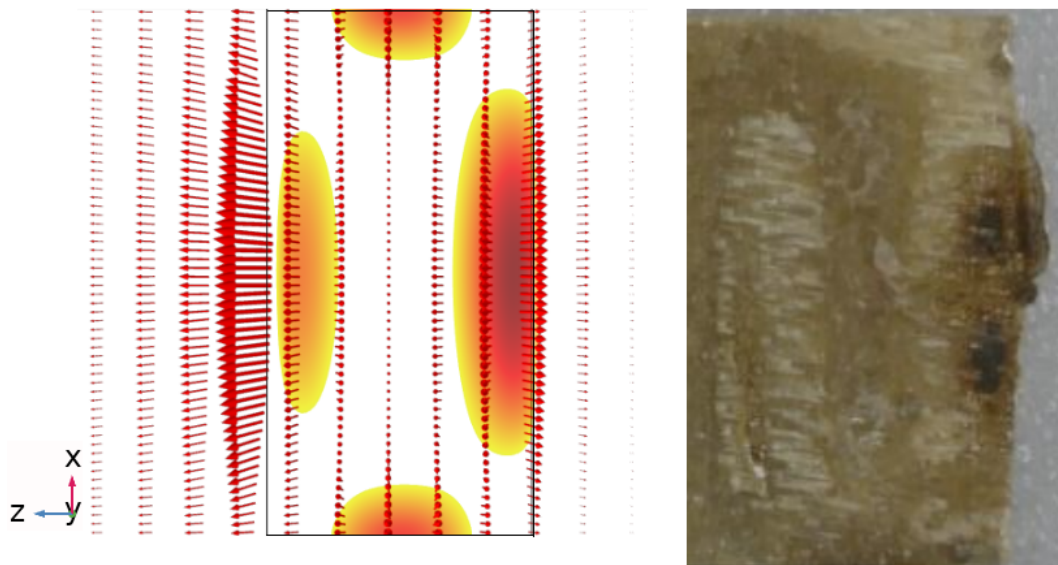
Bypassing heat at the welding interface (top view)
